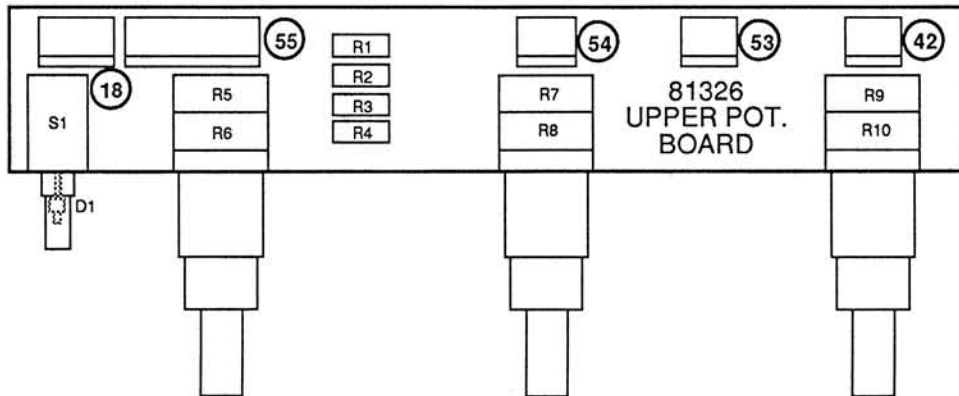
81326 UPPER POT BOARD COMPONENT LAYOUT
